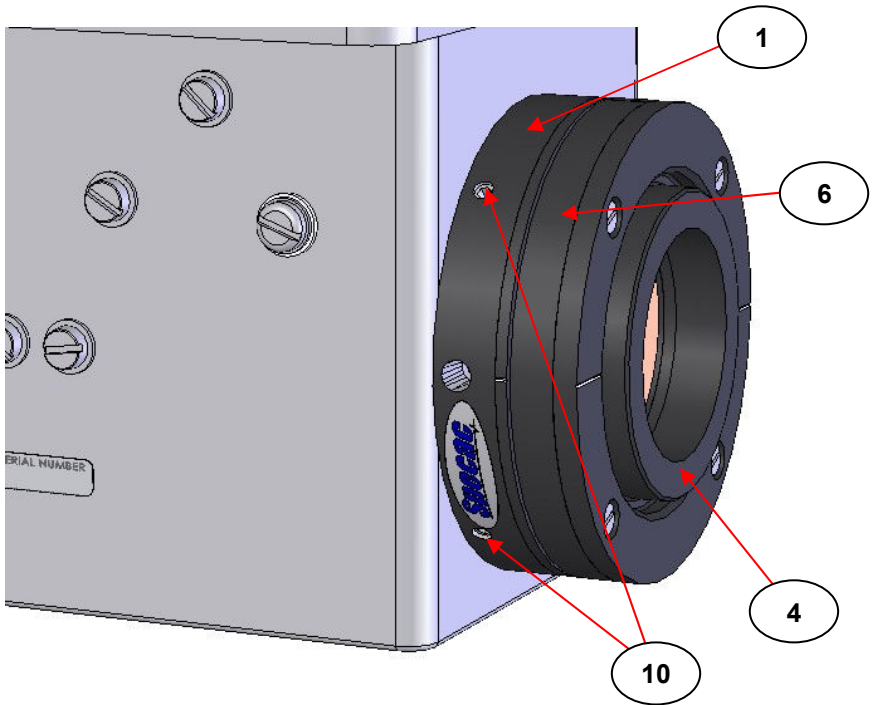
Close Up Rear View of GS12510 Rotator Mount Fixed to the Benchmark™ Optical Unit (Grub Screw Fixings)
